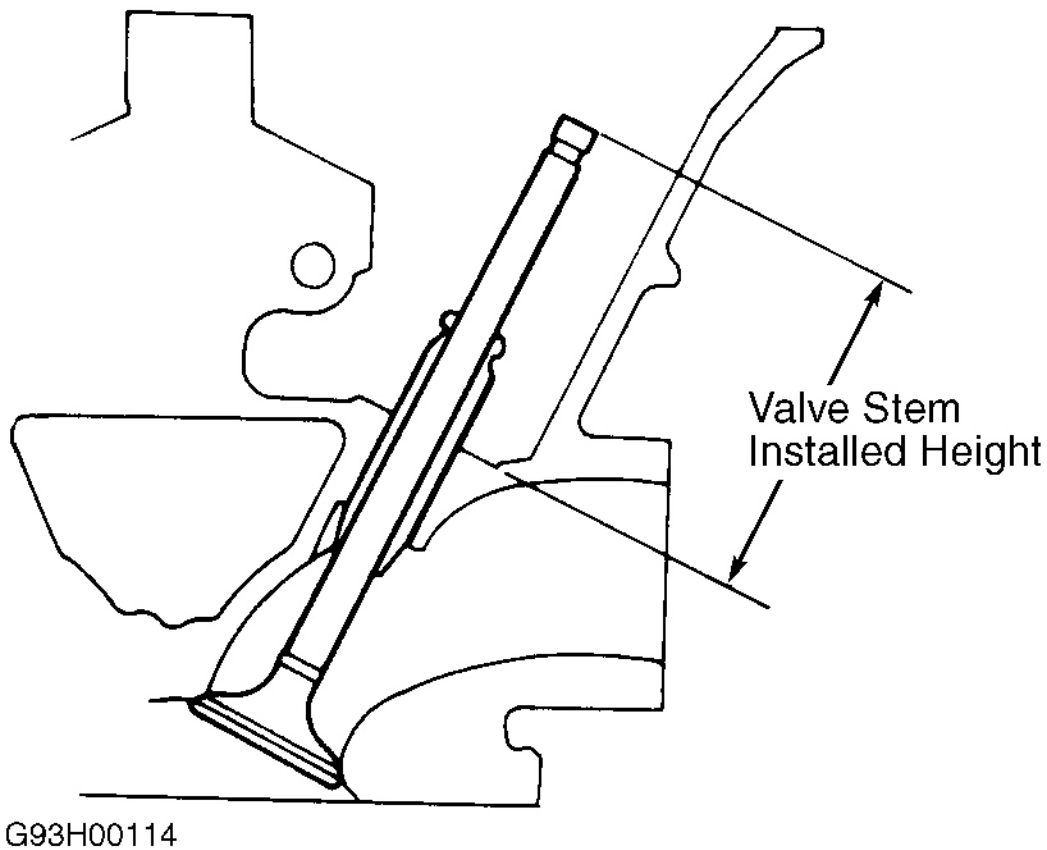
Measuring Valve Stem Installed Height (Typical)
